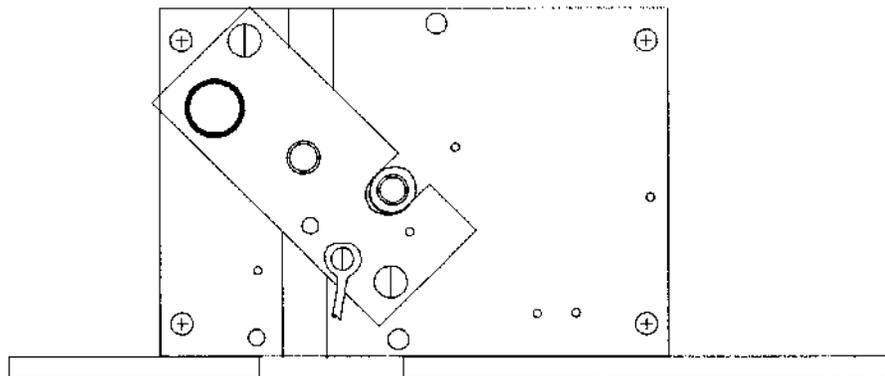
Chuck Holder Plate Mounting to Tighten Rotary Chuck
